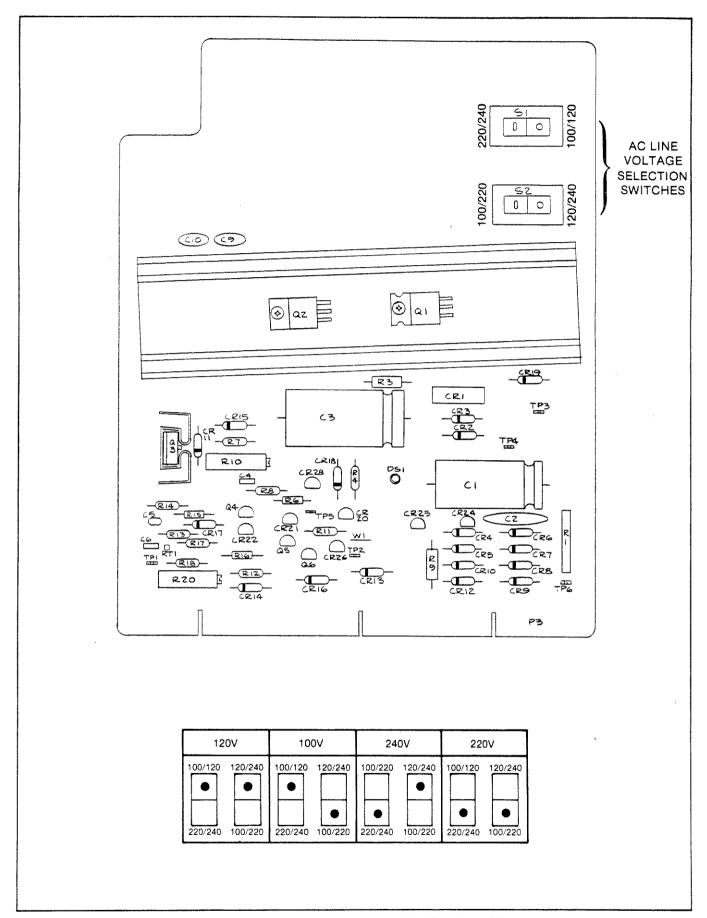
AC Line Voltage Conversion on A3 Pre-Regulator PCB Assembly
